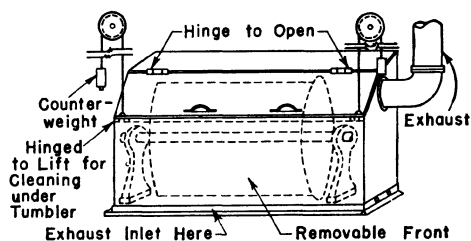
Enclosure and Local Exhaust at a Tumbler
